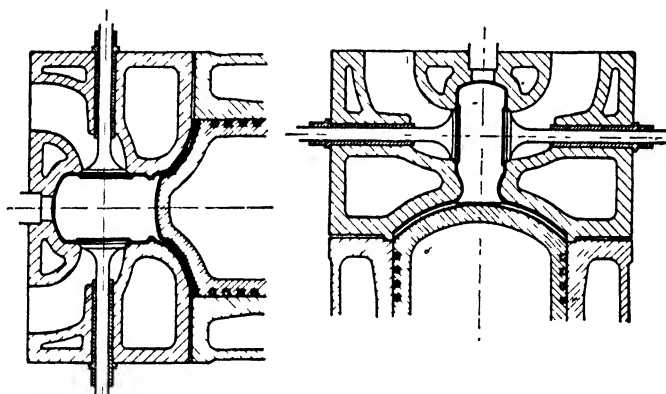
(Left).—DEUTZ CYLINDER HEAD AND DISPLACER PISTON.
